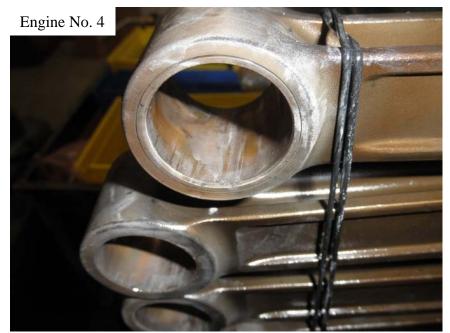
Close up view of a typical articulating rod piston pin bearing showing no damage to the bearing surface.
